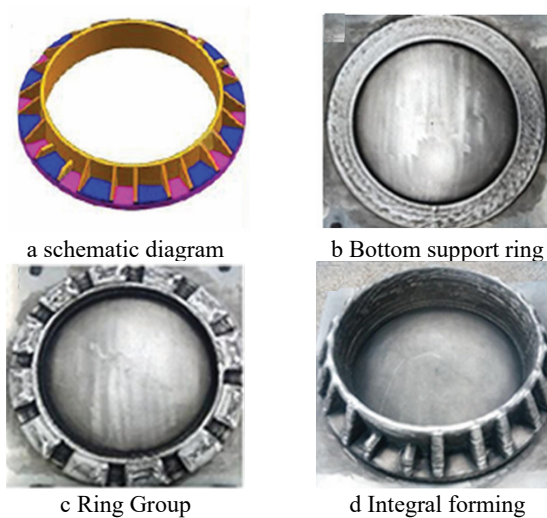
Pulsed GTAW Aluminum Alloy Component
